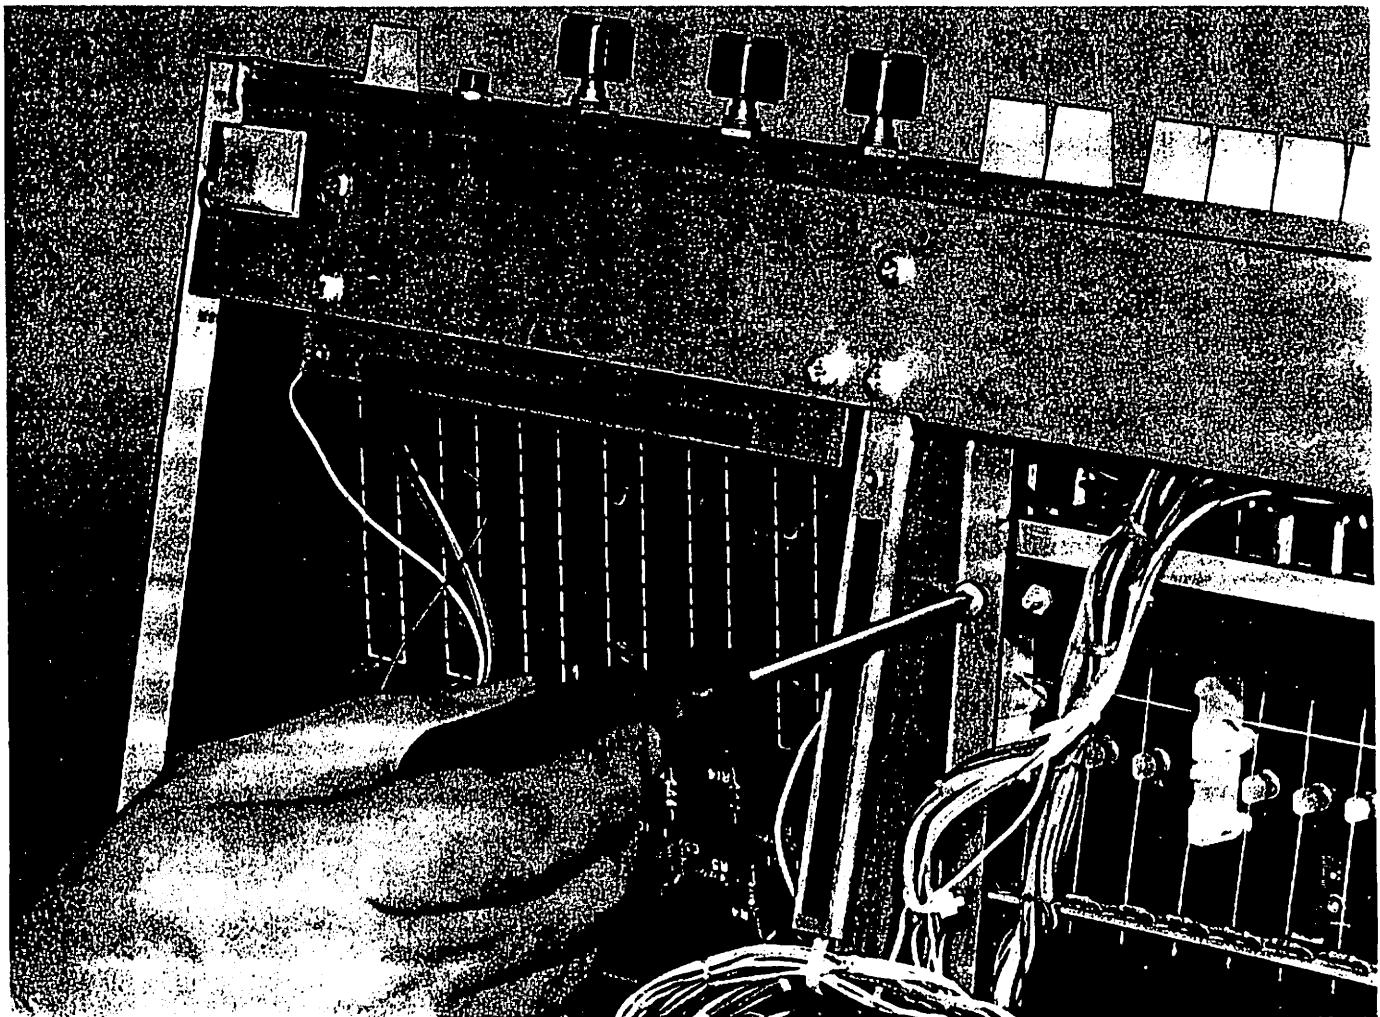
DISASSEMBLY OF MINITMOOG
